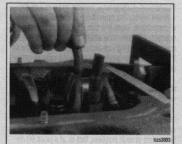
Place rubber hose over the connecting rod studs to protect the crankshaft and cylinder bores from damage
